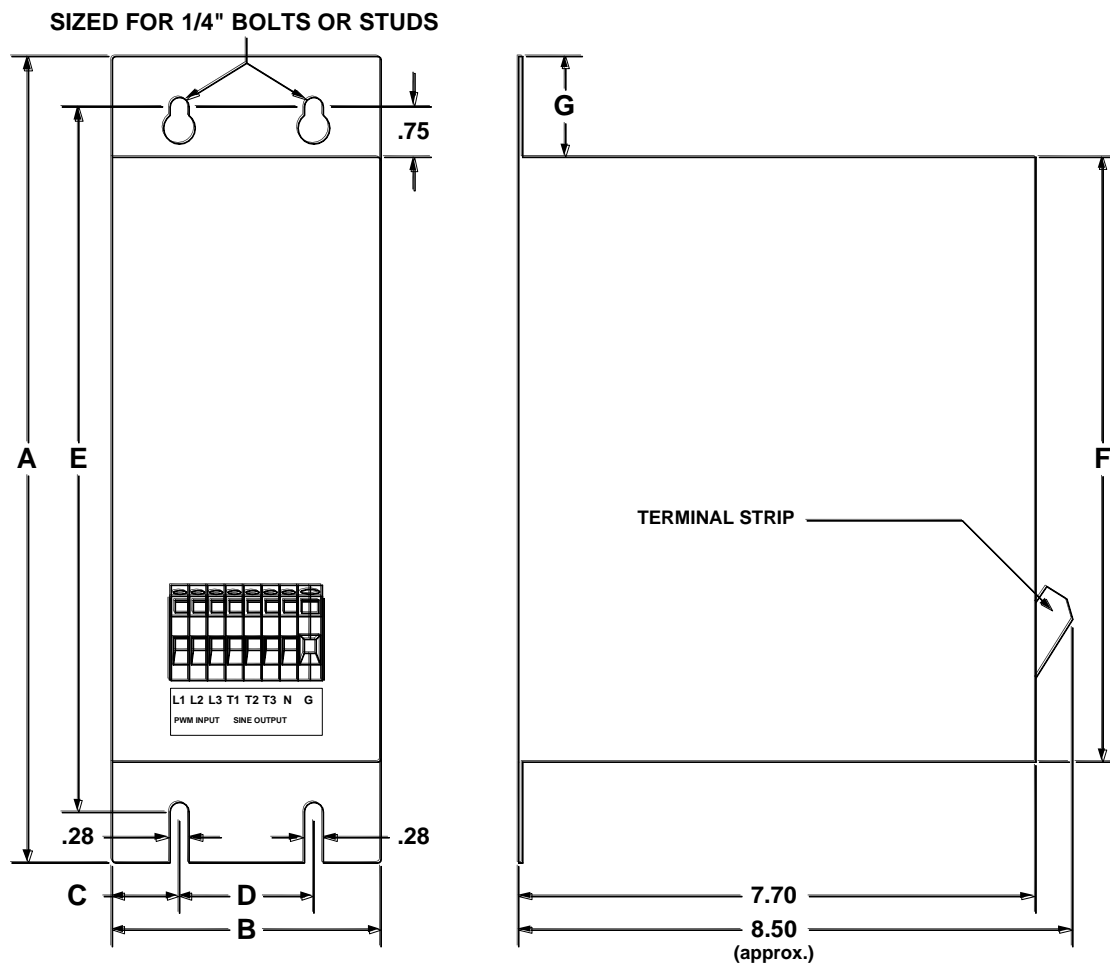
Enclosure Dimensional OutlineTable 6-2: Enclosure Dimensions
